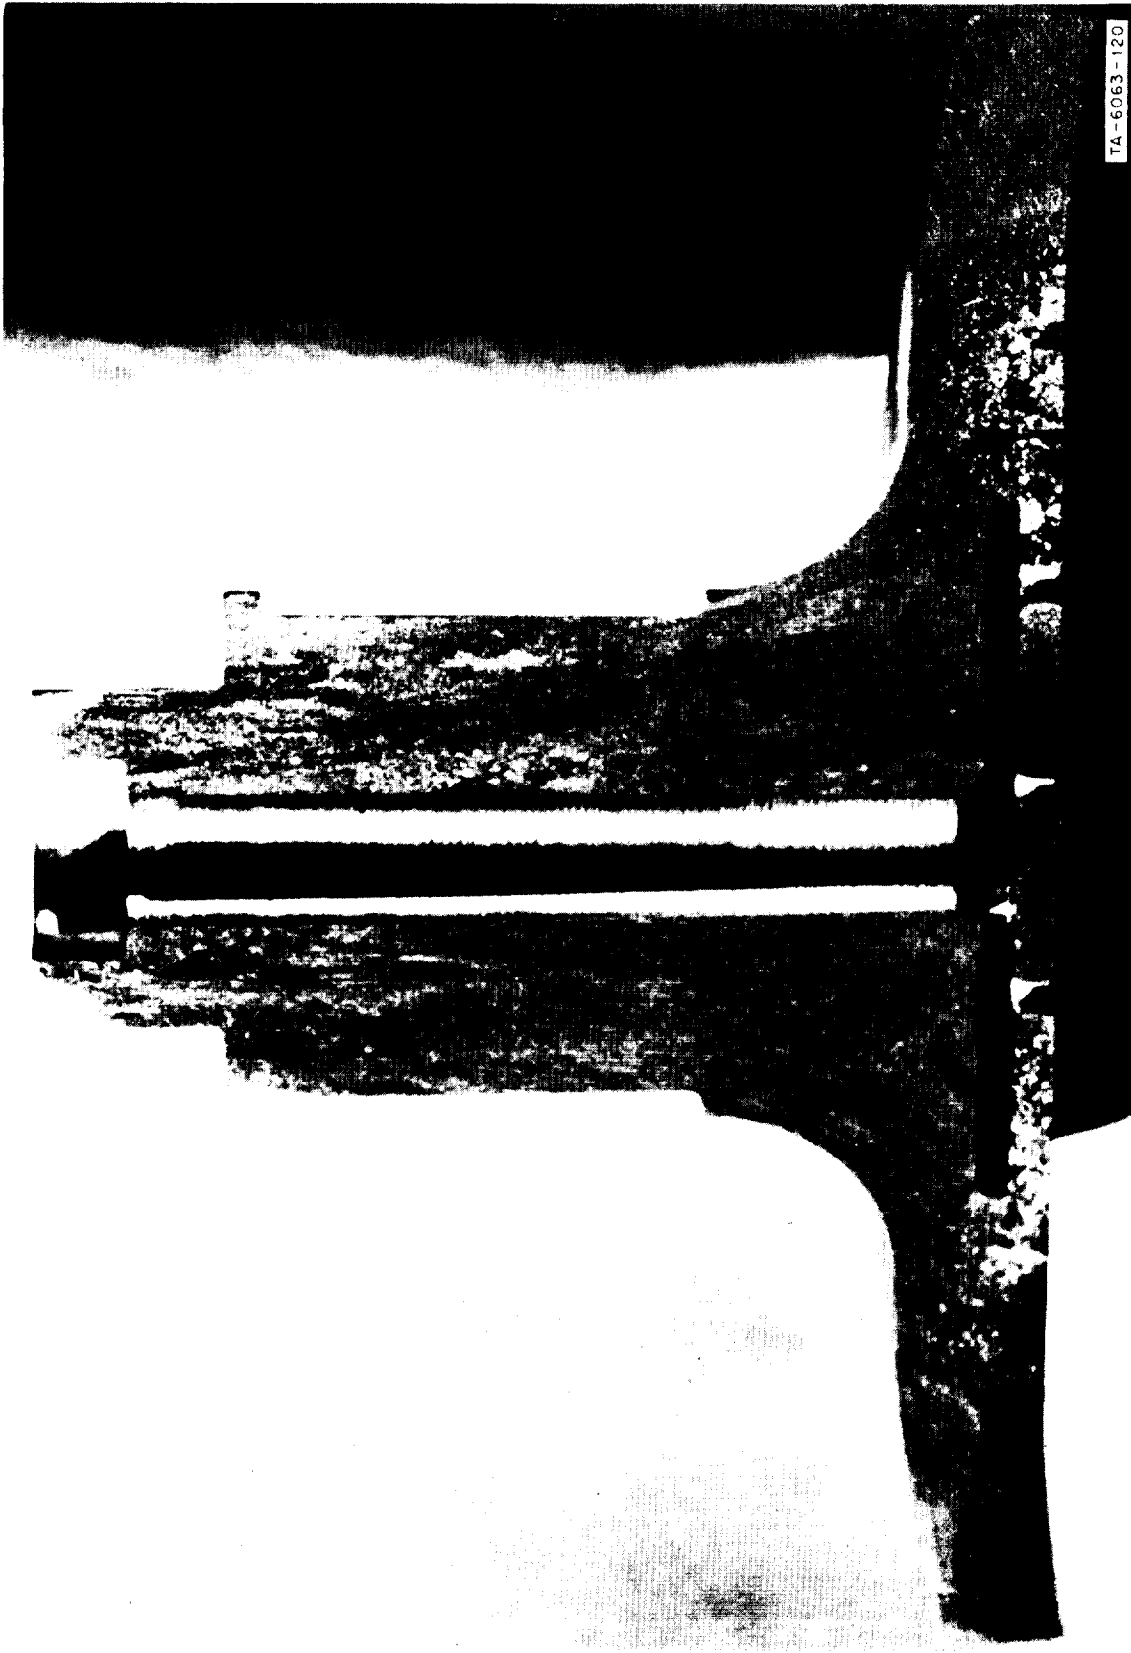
CROSS-SECTION OF GENERANT TANK OUTLET PORT AND BARRIER PLATE;
